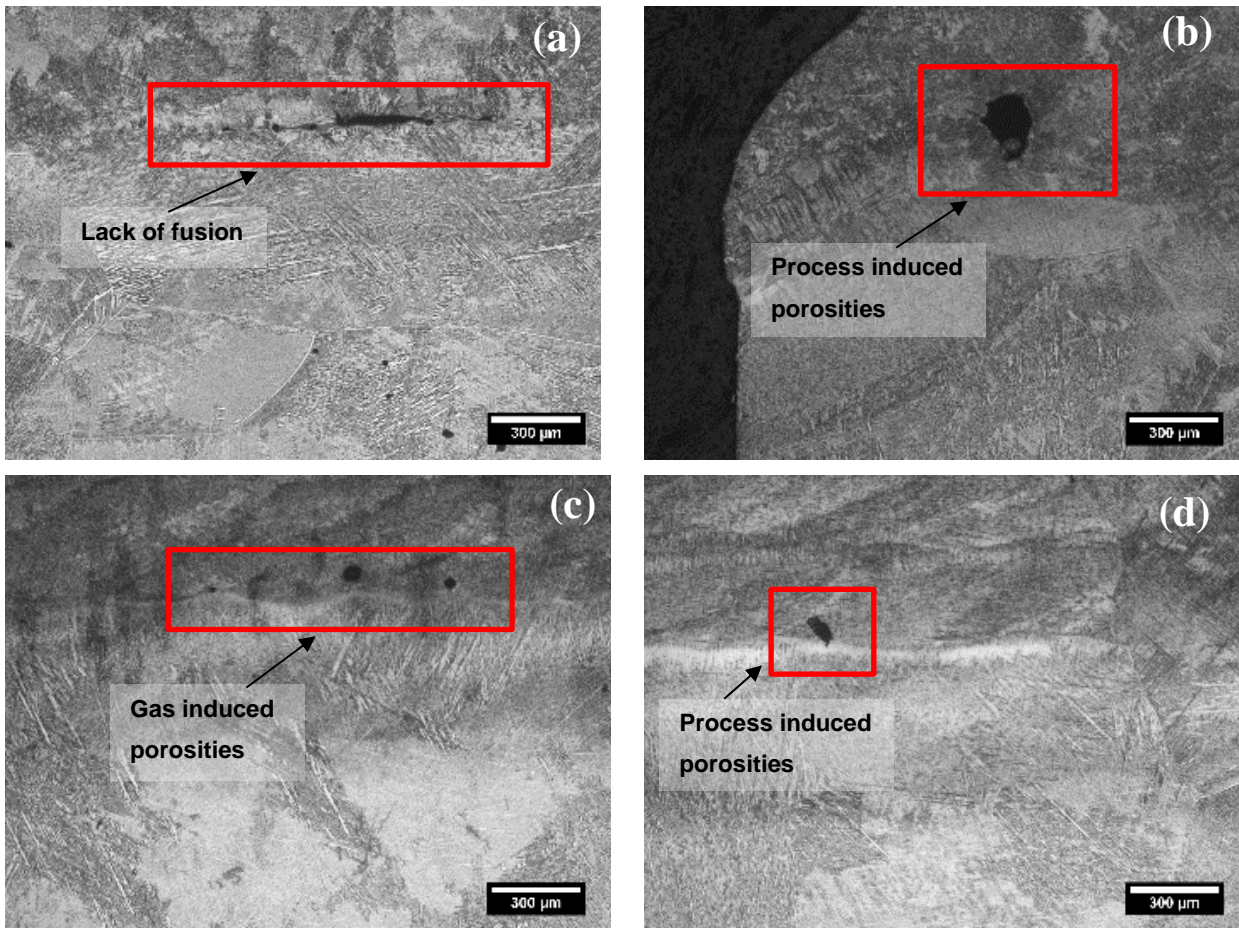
Defects, in the diffusion zone of HM specimens, resulting from (a) as-cast surface, (b) ablation, (c) sandblasting and (d) chemical milling techniques
